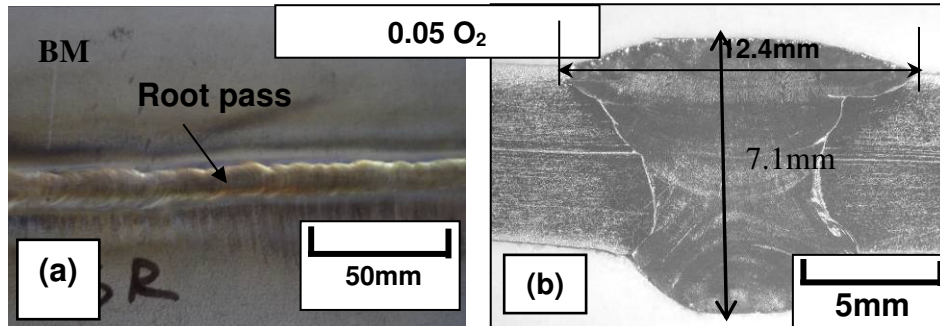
Photograph of root side (a) and macrograph of a cross section (b) of GTA welded joint produced using 0.05% oxygen in purging gas, 125A welding current, 14V welding voltage and 135mm/min welding speed and 15 l/min argon shielding.
